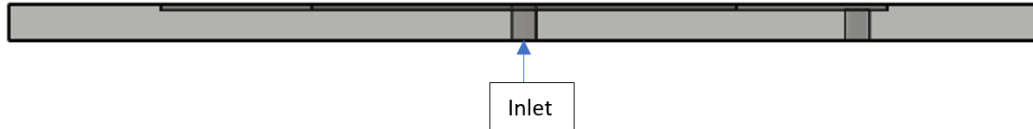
Side view of the Version 3 of the valve seat design presented in Chapter 5
